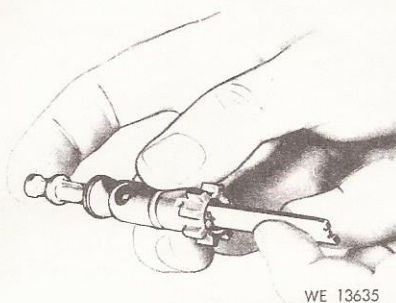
Checking Bolt with Firing Pin Protrusion Gage - 7799735
